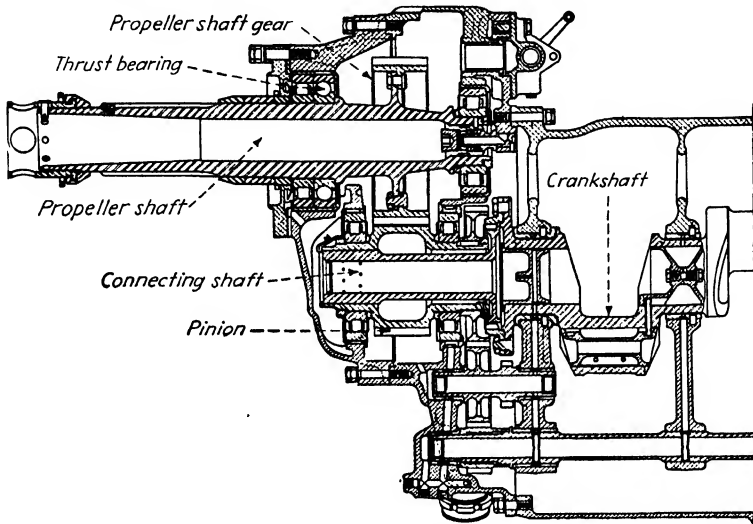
Spur-type propeller-reduction gear. (Ranger Aircraft Engines Division of Fairchild Engine and Aircraft Corporation.)
